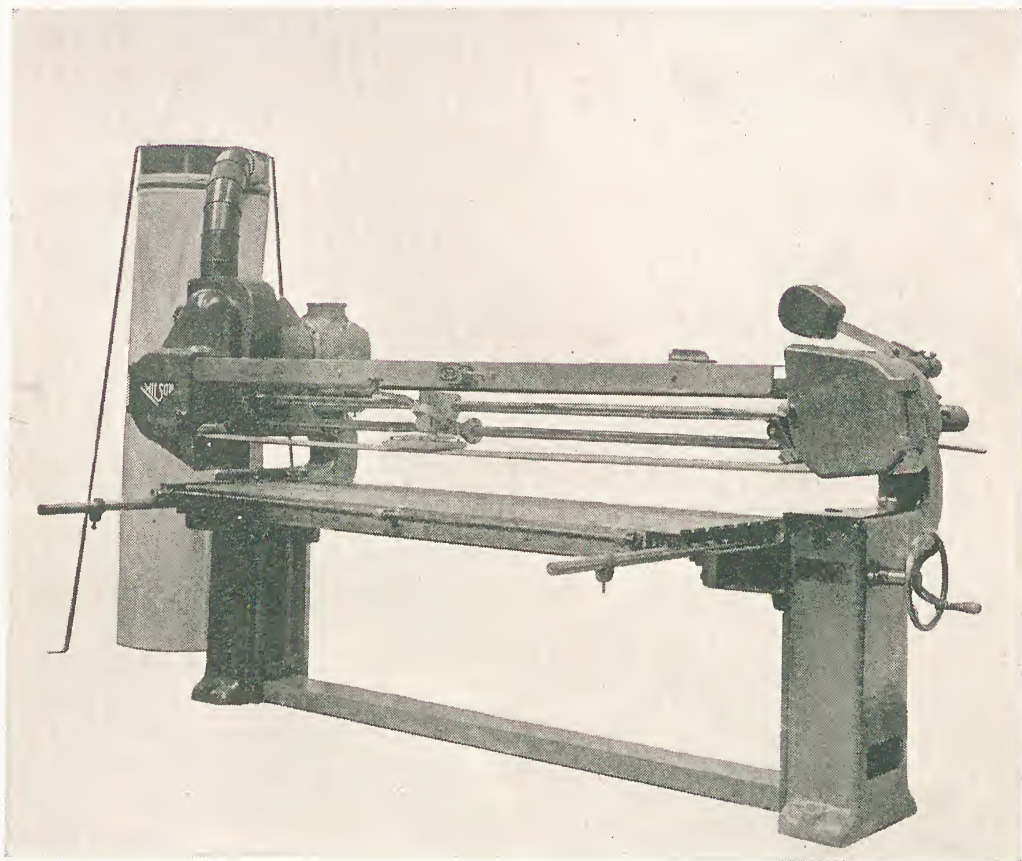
Motorised open-end belt sanding machine. (Courtesy of Wilson Bros. [Leeds], Ltd.)
